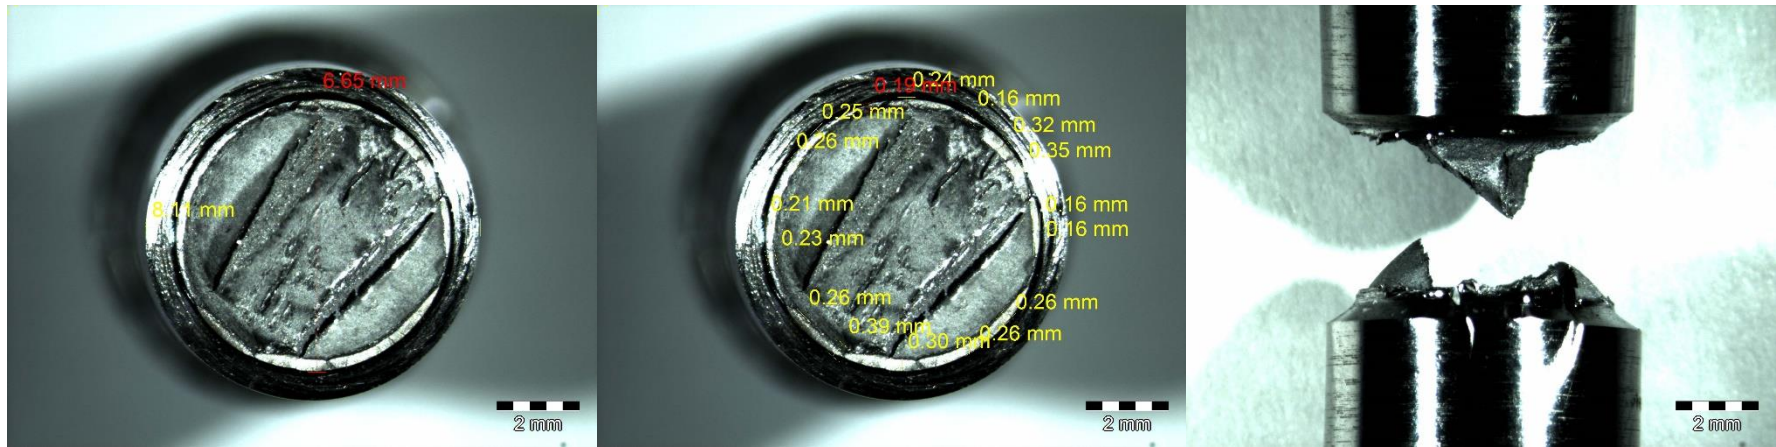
Cross-sectional and side view of fractured StxLSD-03
